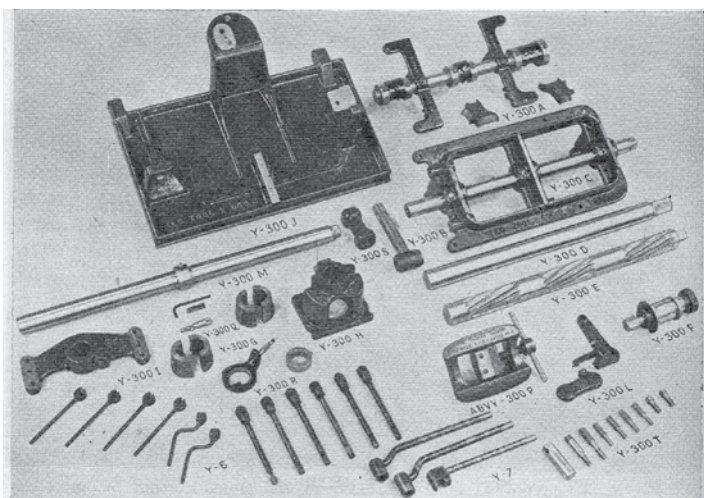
METALLING AND BORING JIGS FOR FORD MODEL "Y". Note the two guides for pouring the hot metal (on either side of the figures Y.300 A). At Y-300 F will be seen the tool for radiusing the rear main bearing. (By courtesy of V. L. Churchill Limited)
